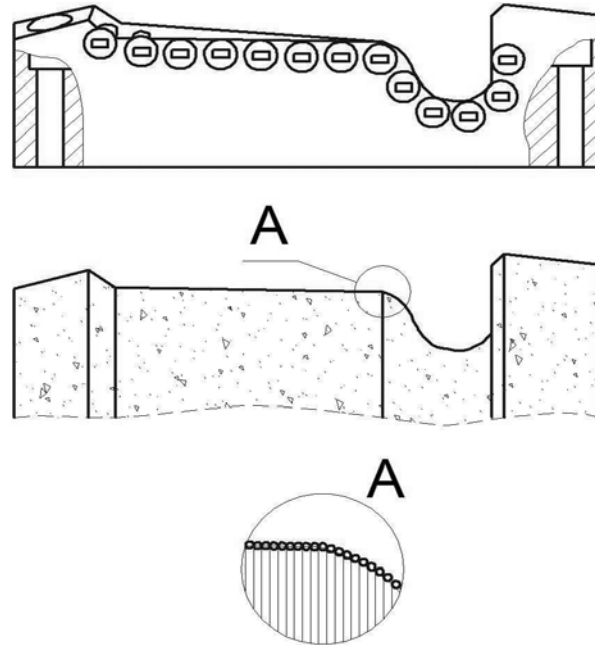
Analog of the cutting part of the molded cutter and grinding wheel
